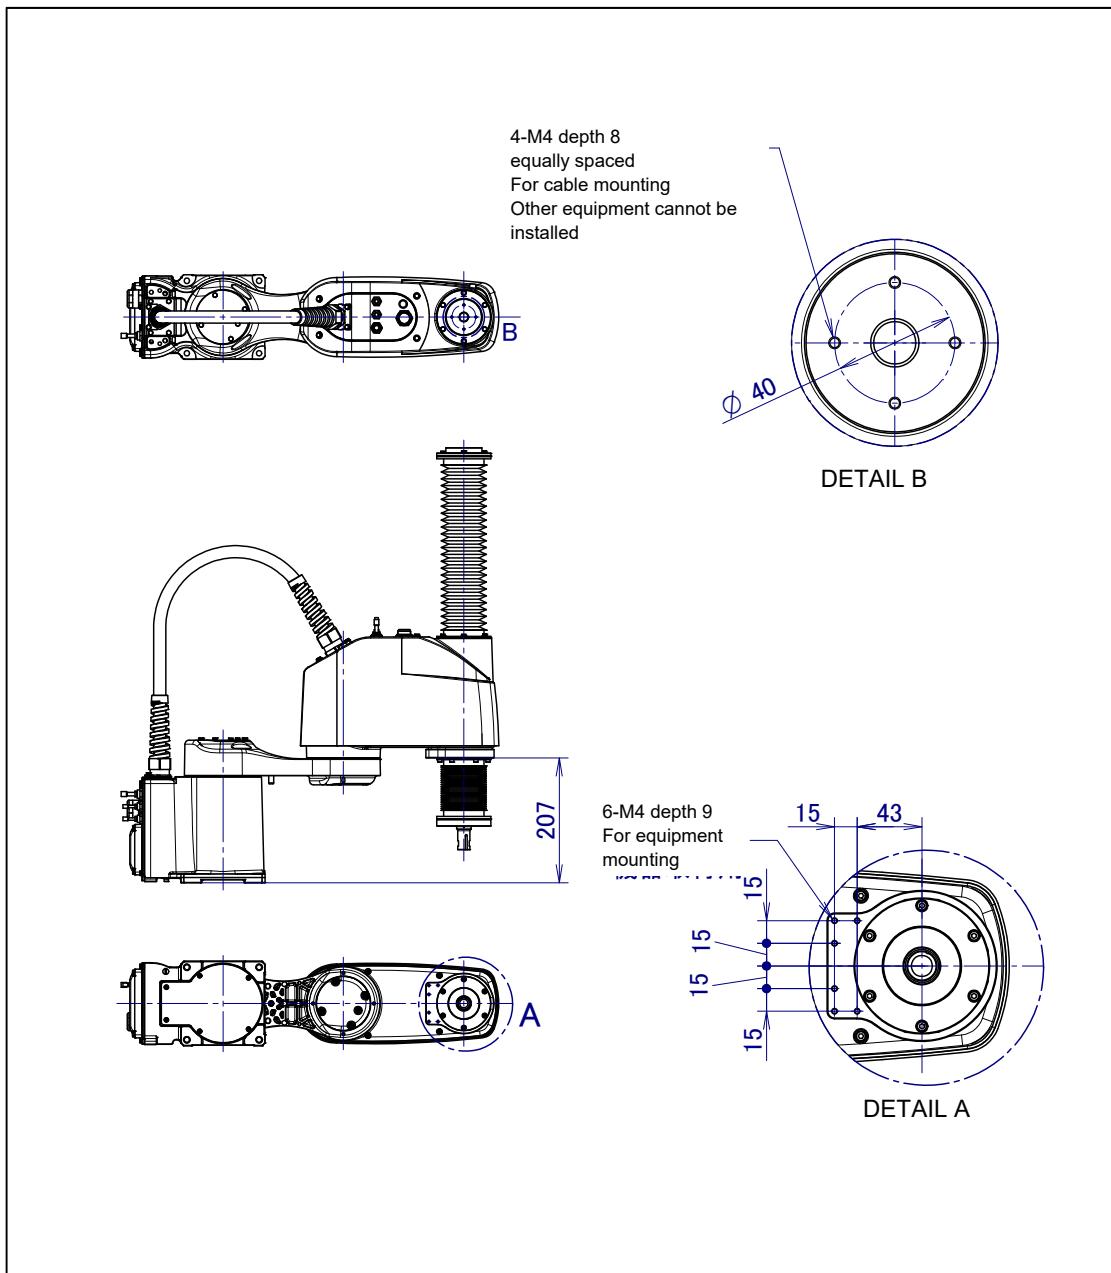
(b) Equipment mounting faces (SR-3iA/C)
